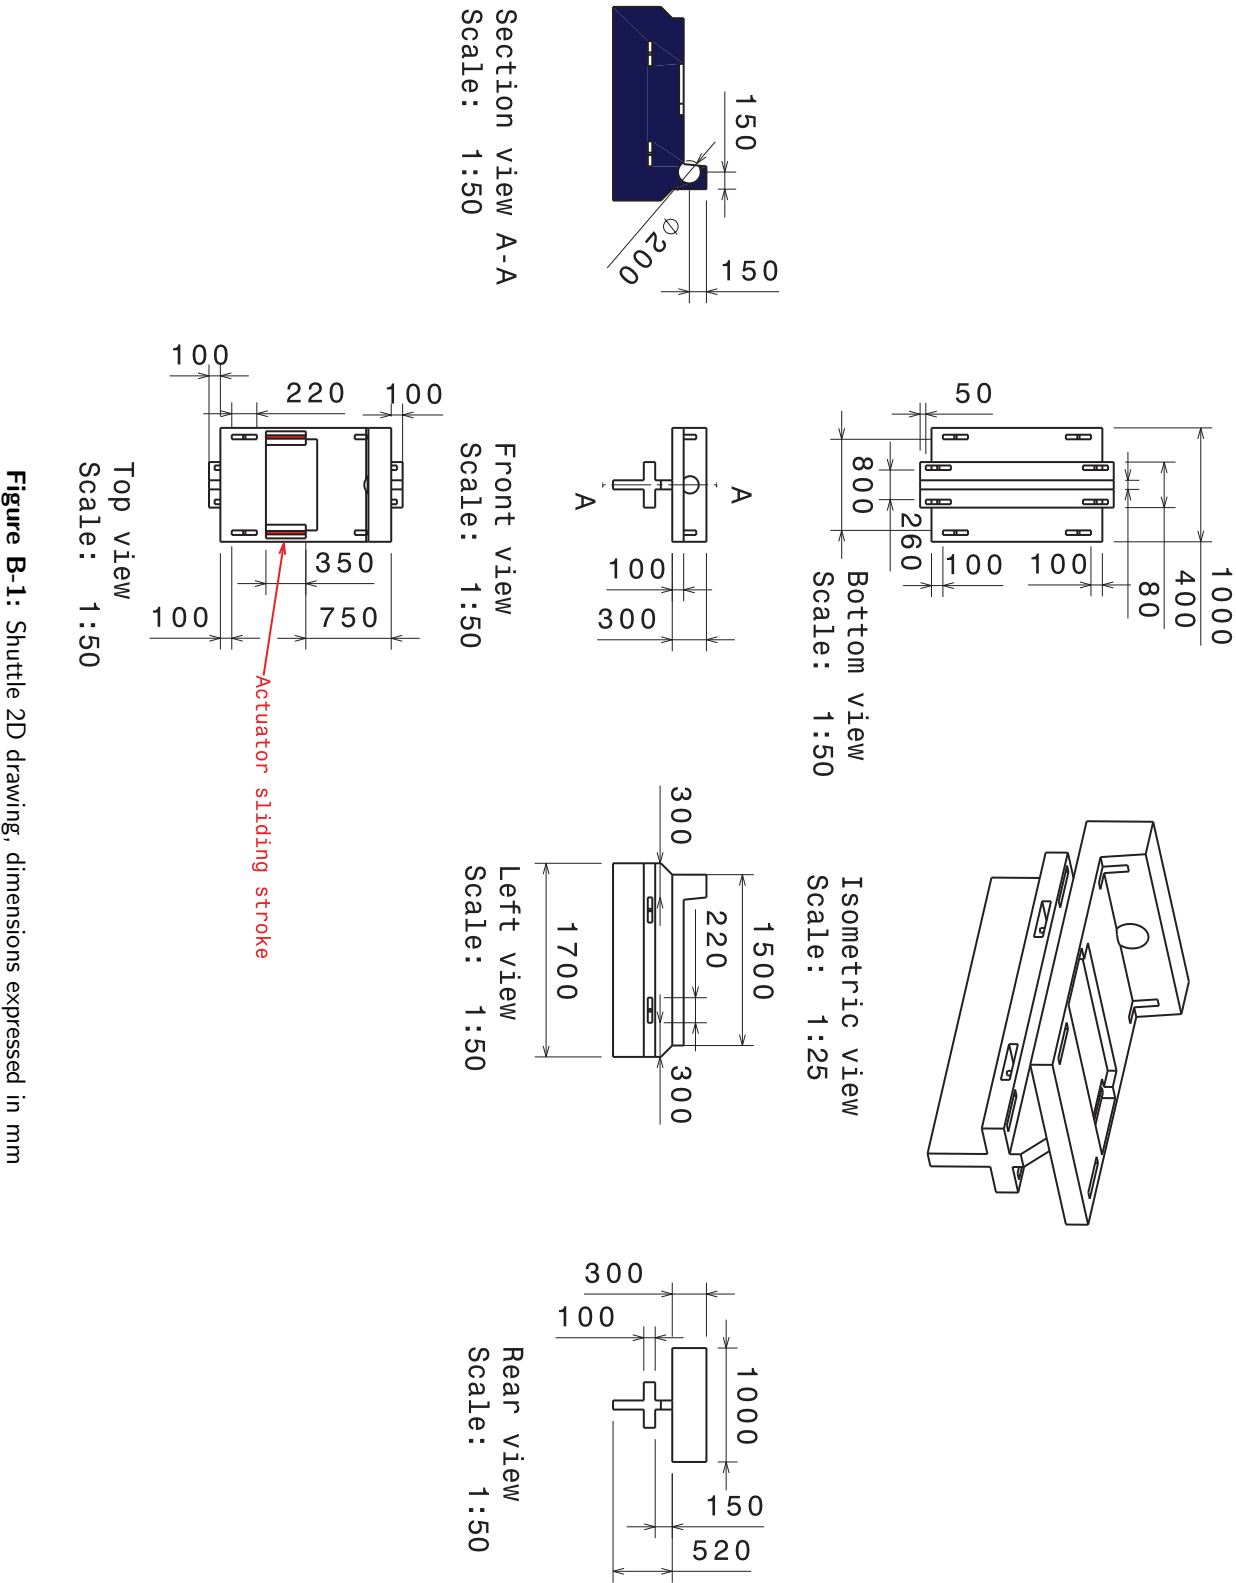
Shuttle 2D drawing, dimensions expressed in mm
